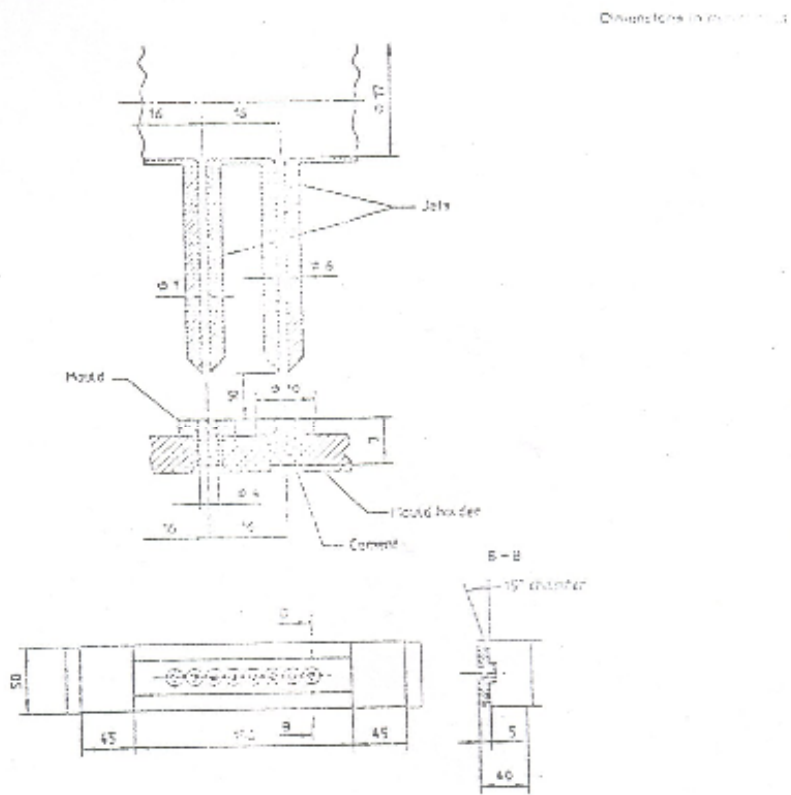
Erosion apparatus - Detail of jets and mould holder
